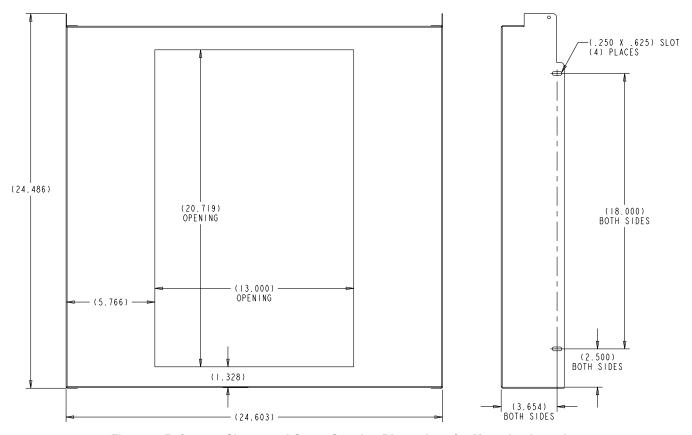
Reference Sheetmetal Cover Opening Dimensions for Mounting Icemaker.
